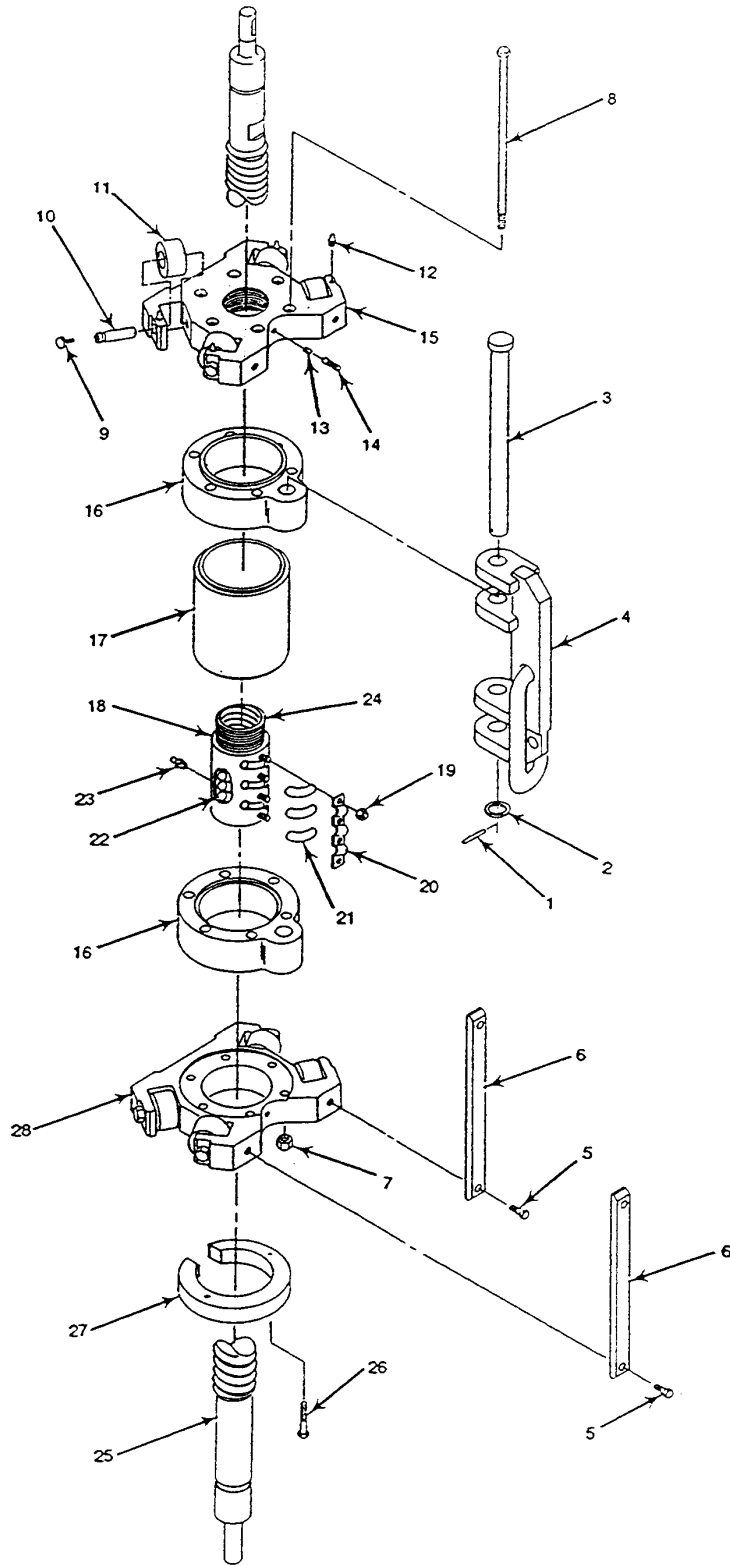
Carriage Assembly, Models B-9A, B-12
